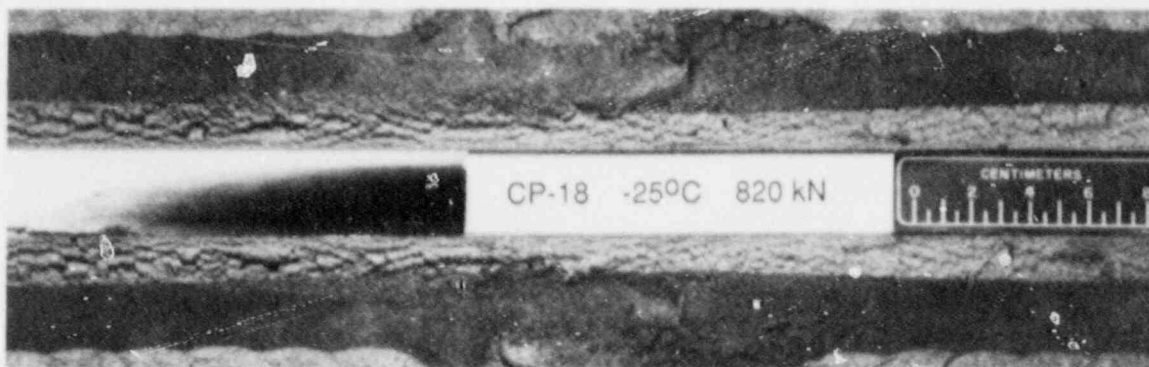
Fracture surface of plate CP-18. Note similarity to fracture surface of plate CP-19 shown in Fig. 7.17.
